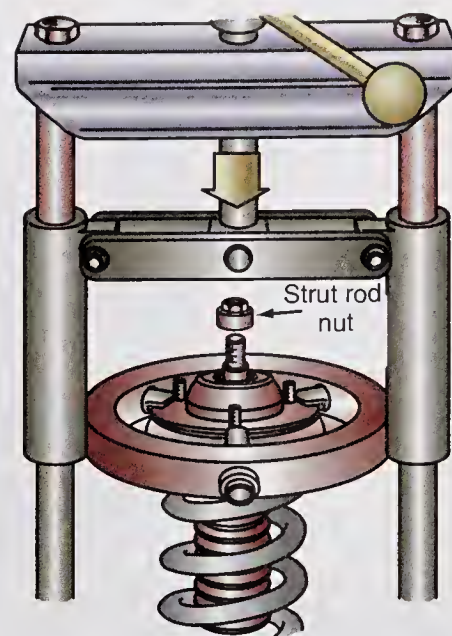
After the compressing tool is operated to remove all the spring tension, remove the strut rod nut.
